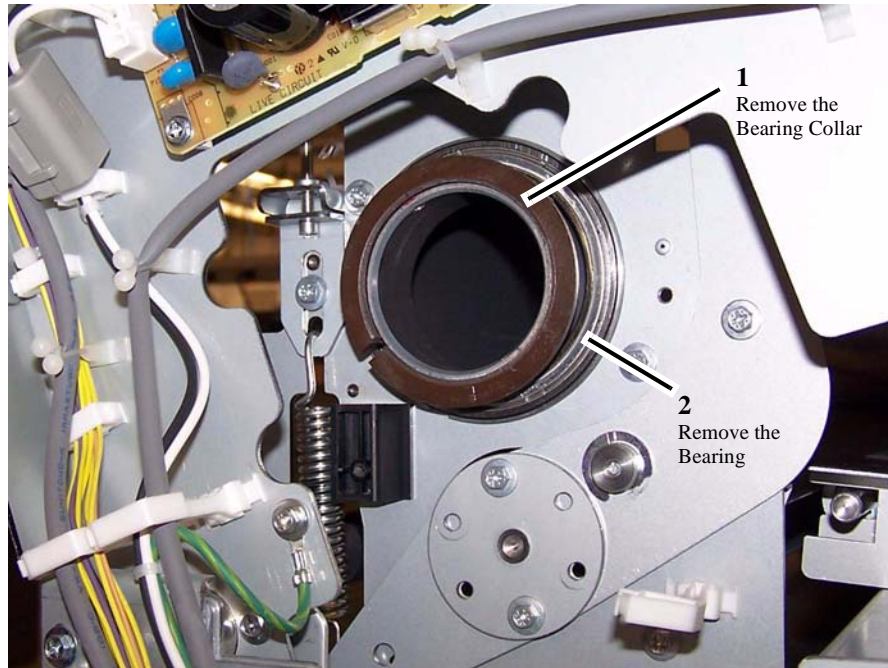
Removing the Bearing Collar and the Bearing (right end of Fuser Roll)
